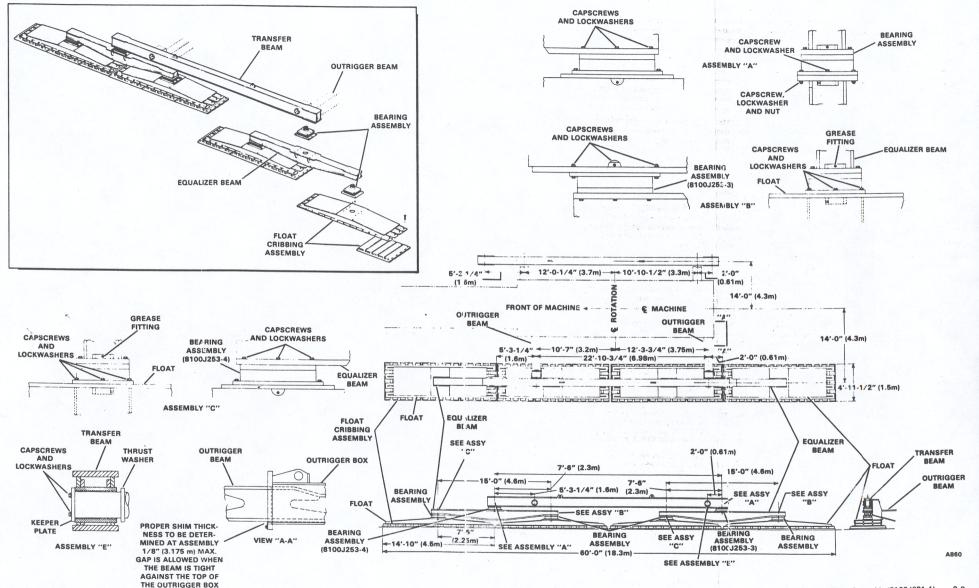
Malkiel Float Assembly (8100J631-1) 2-9
